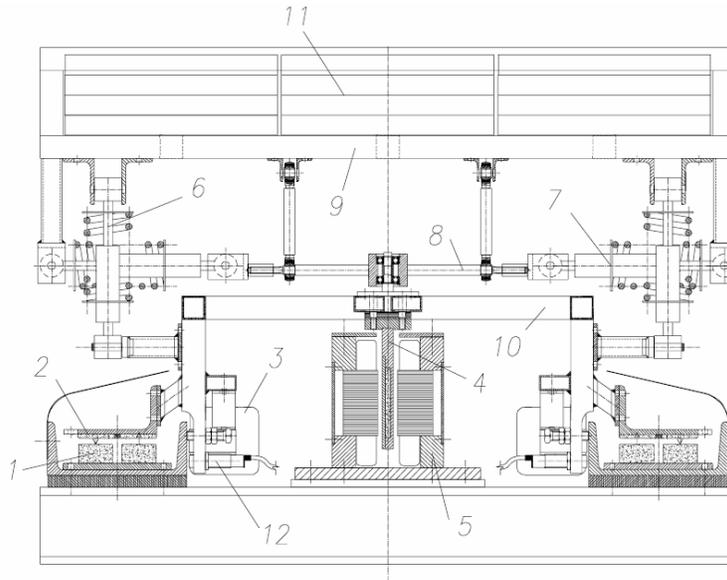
Transversal view of the prototype. (1) Fixed magnets, (2) Moving magnets, (3) Electromagnets, (4) Linear motor cursor, (5) Linear motor stator, (6) Secondary suspension, (7) Lateral dampers, (8) Watt mechanism, (9) Payload, (10) Trolley, (11) Ballast, (12) Position sensor.
